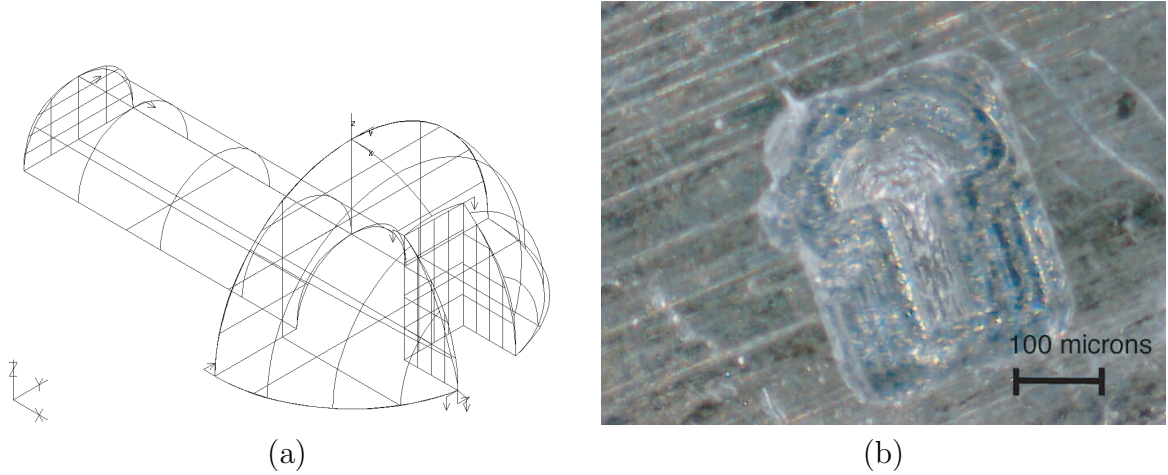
Stages of micro bolt fabrication (a) computer generated wire-frame model (b) top view of the machined bolt
